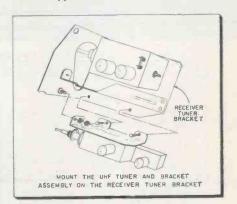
Entire UHF tuner assembly is secured to the VHF tuner mounting bracket.
